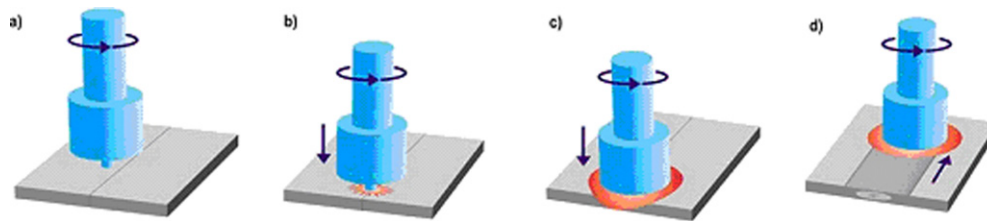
FSW phases: (a) initial, (b) plunging, (c) dwelling, (d) welding.
